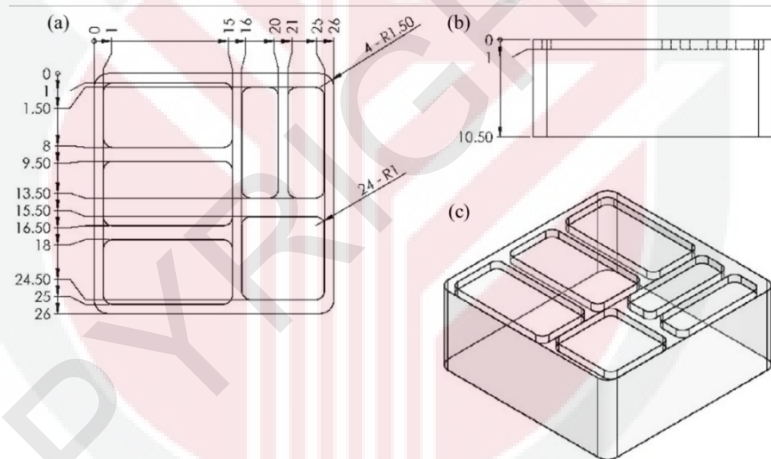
Dosimeter holder (D5): (a) Top view, (b) side view, (c) orthographic view
